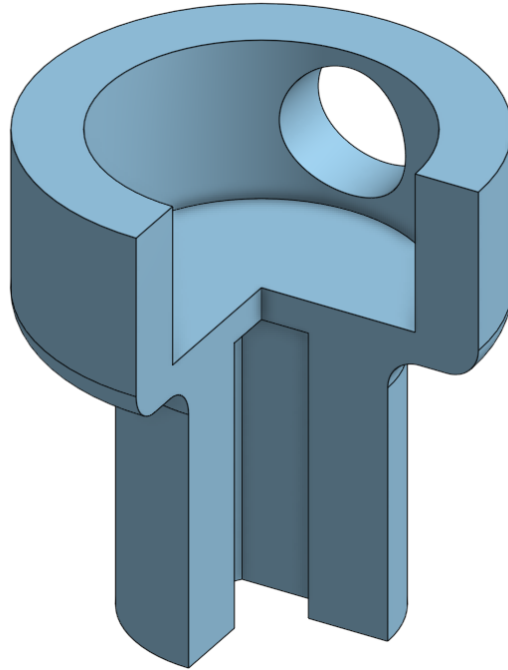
Lead screw to motor adapter Cad model: Isometric section view
